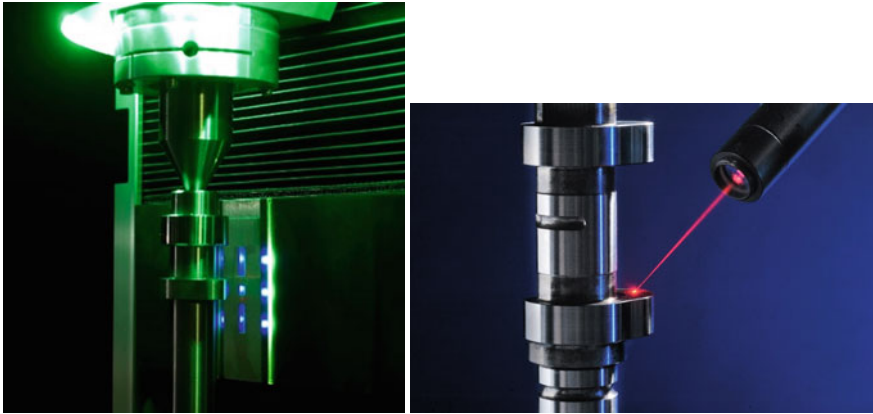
Left: Inspection machine for shafts. Right: Detailed view with a » bd-1 « sensor directed to a cam mounted at the shaft
